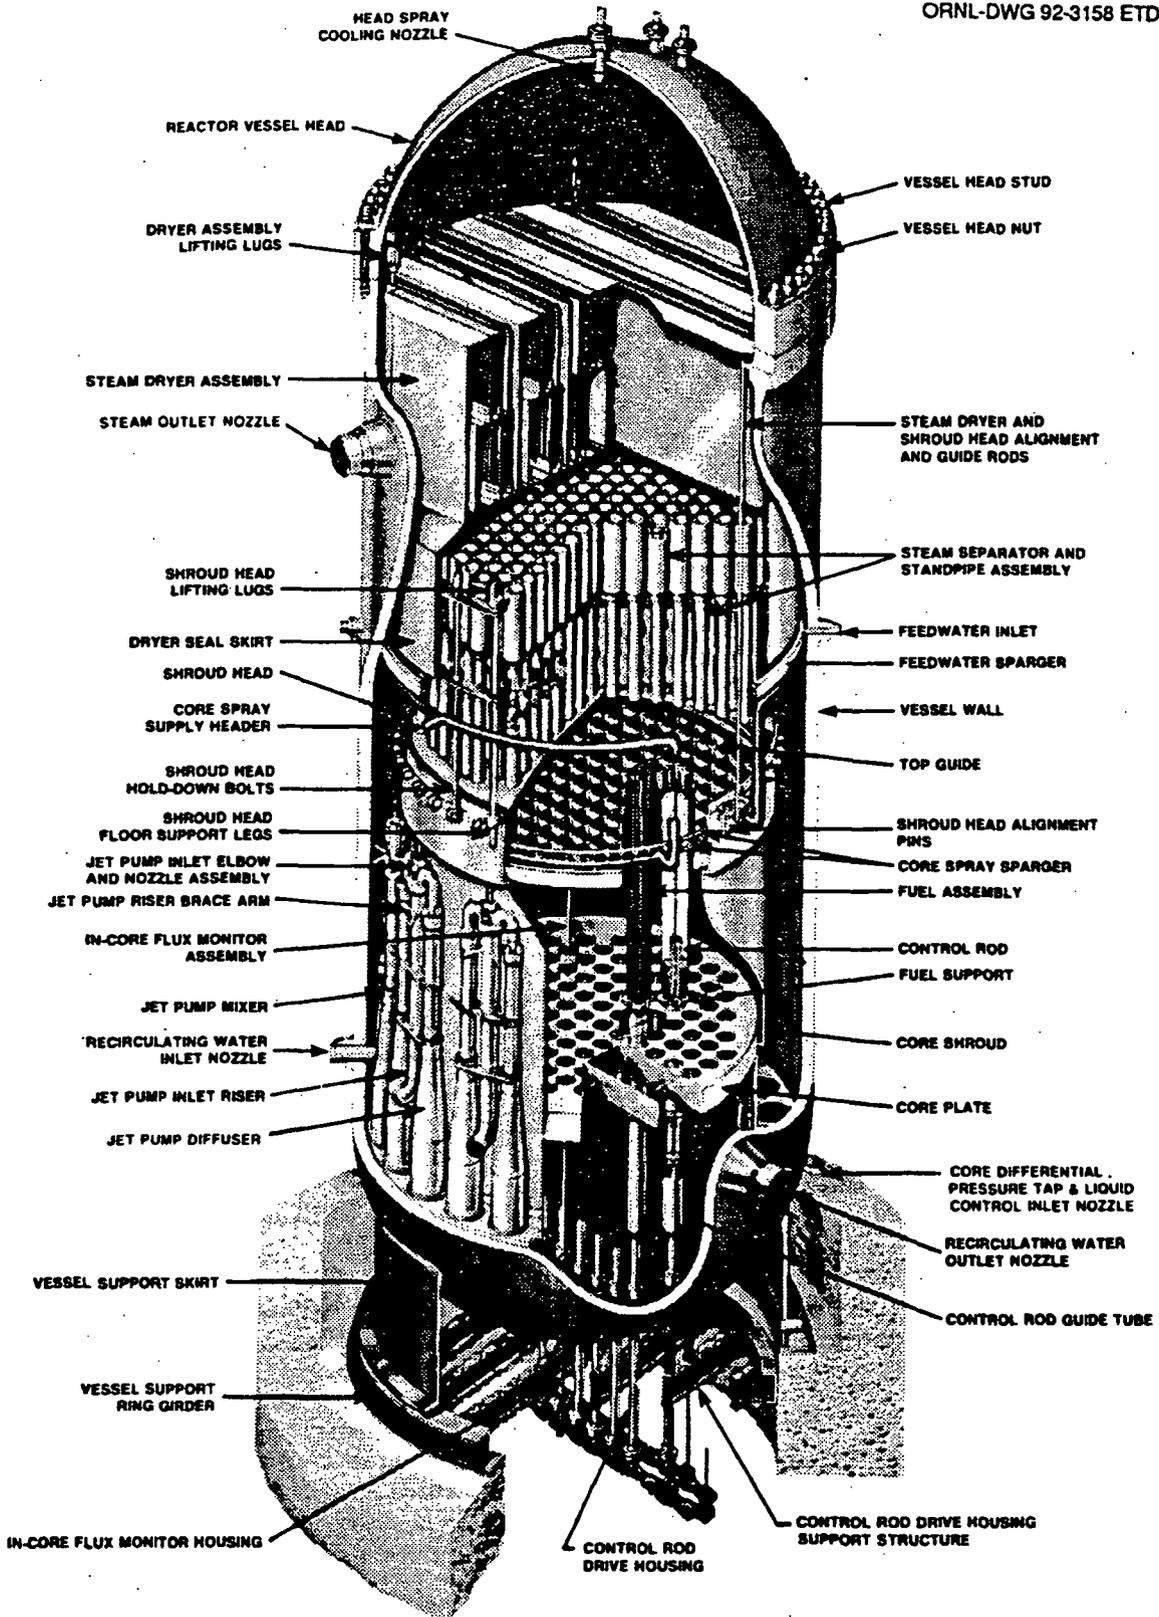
Cutaway drawing of BWR-4 reactor vessel
